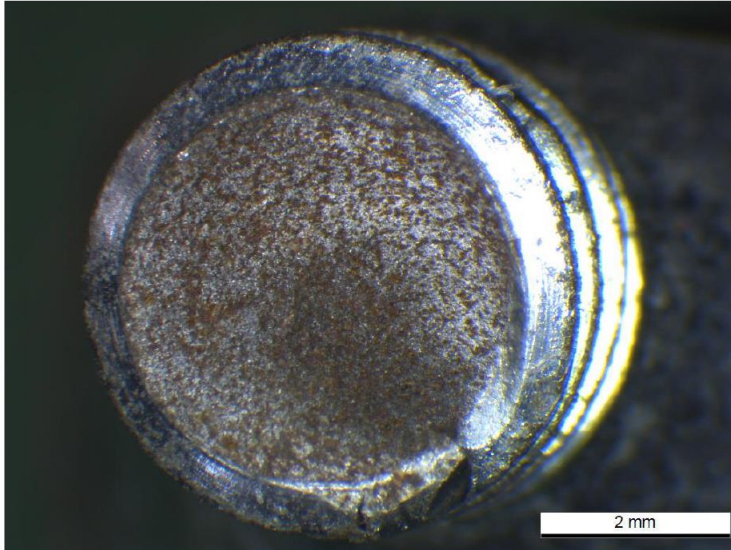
Aft left hand steering rod fracture surface with signs of surface corrosion.
